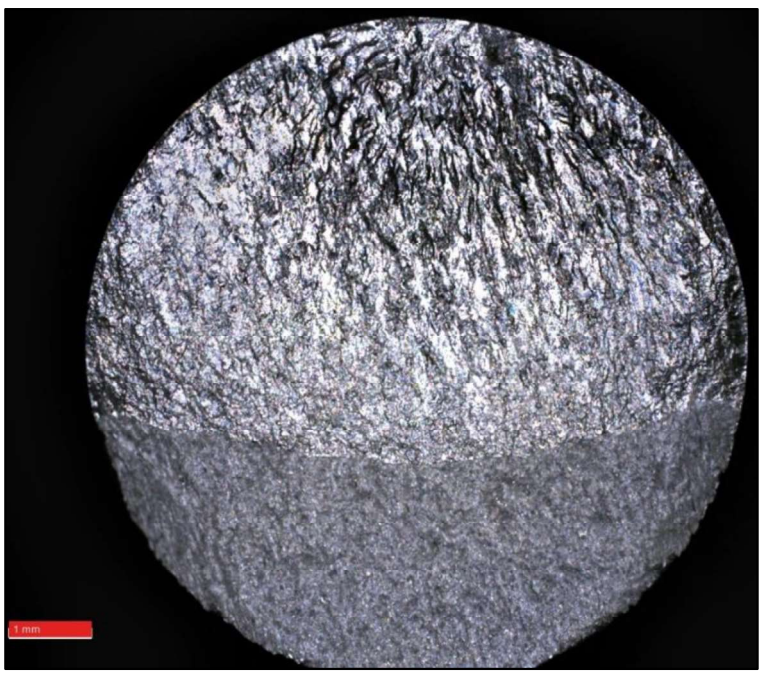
Digital microscope image of PRET-5 fracture surface
